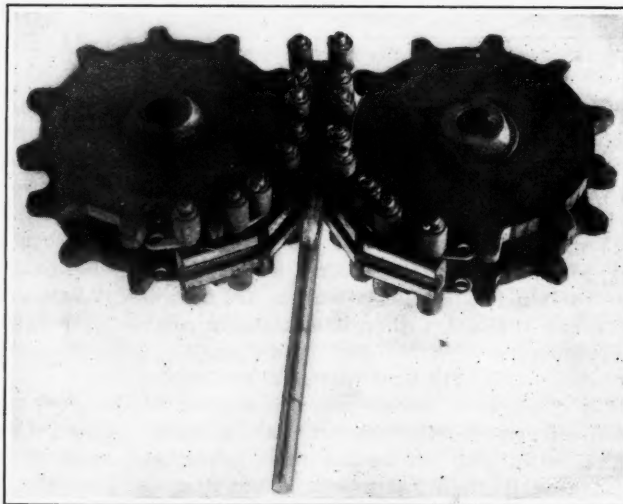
Bottom View showing Mold Sections separating and Cast Rod leaving Machine
